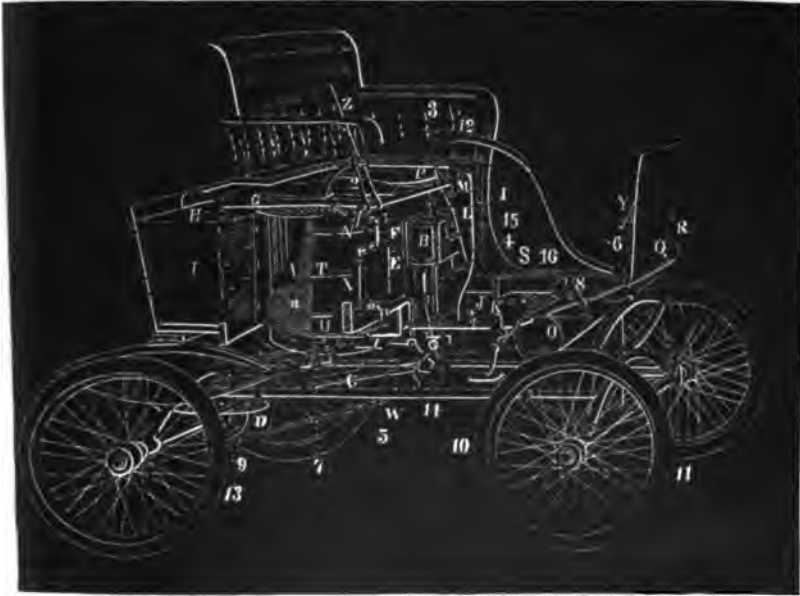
Part sectional view of the "Locomobile" Steam Carriage, showing machinery and parts in position.
